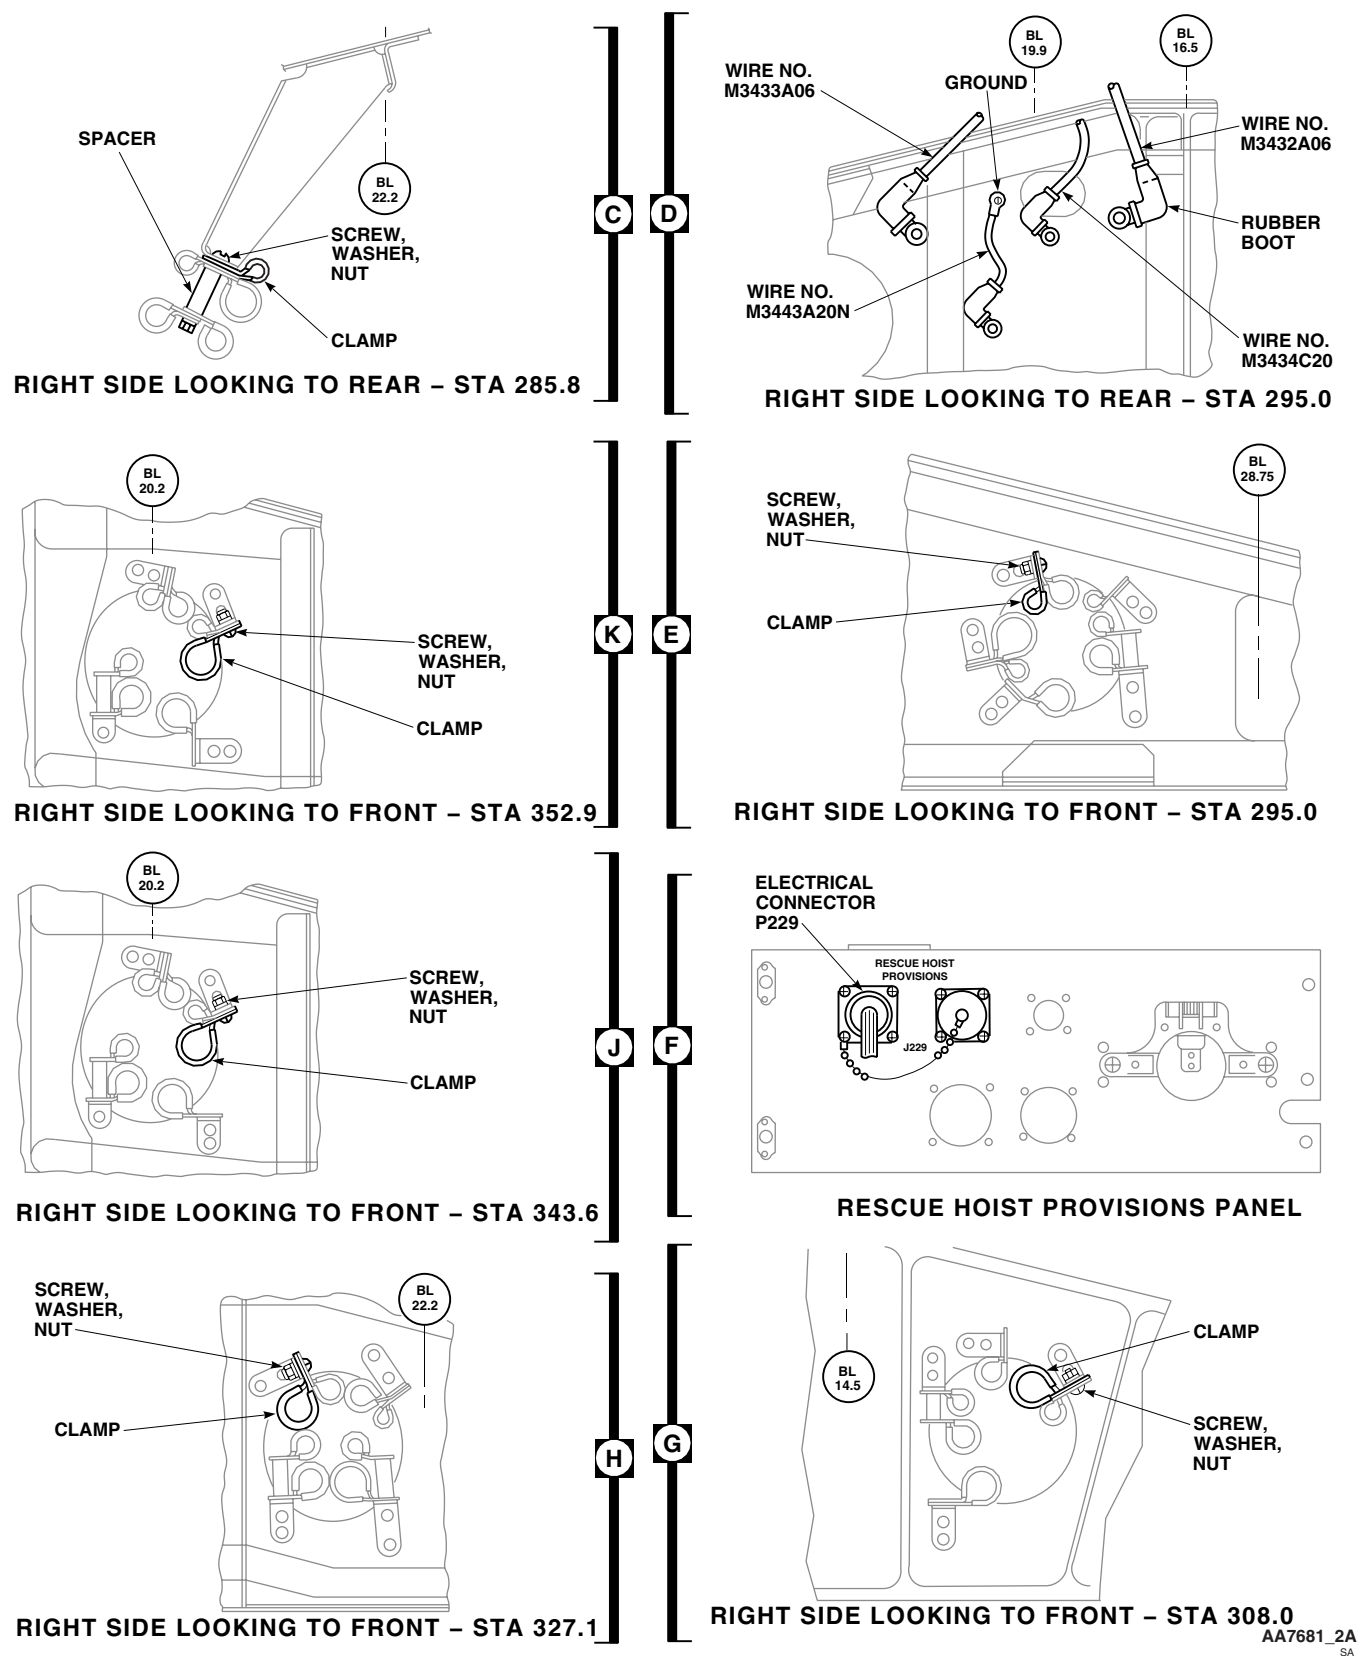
Remove/Install Rescue Hoist Harness. (Sheet 2 of 3)
